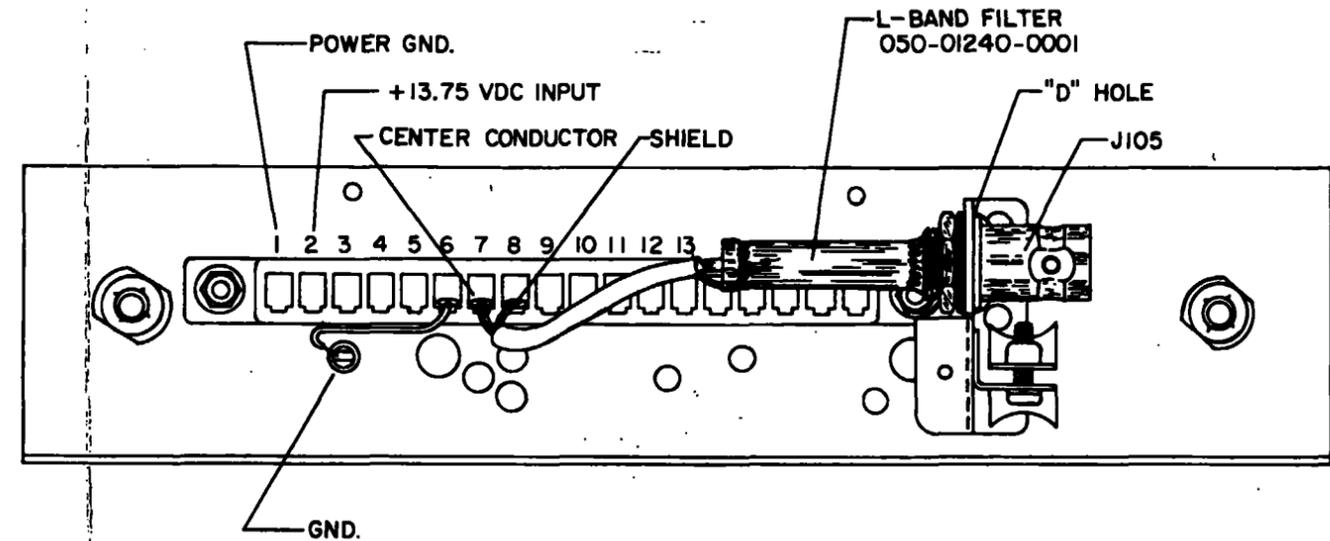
14/28 REAR PLATE ASSEMBLY DRAWING AND VOLTAGE CONVERTER SCHEMATIC
